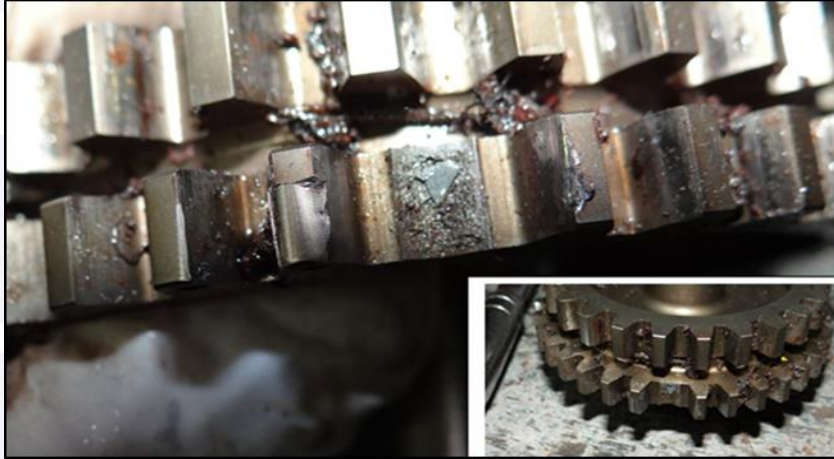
View of the tooth fracture of the left magneto drive synchronizing gear and the valve control.
